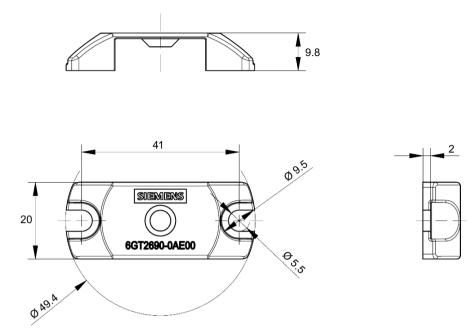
Dimension drawing of fixing hood 6GT2690-0AE00
